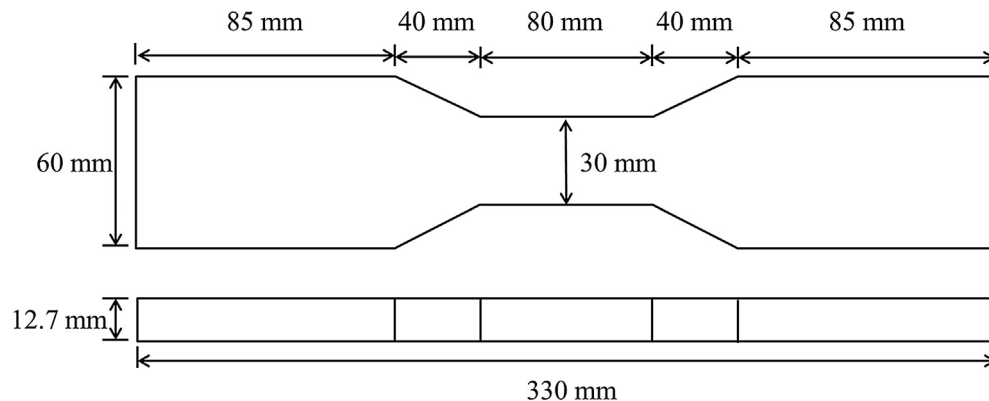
Dimensions of dogbone-shaped specimen for uniaxial tension test.
